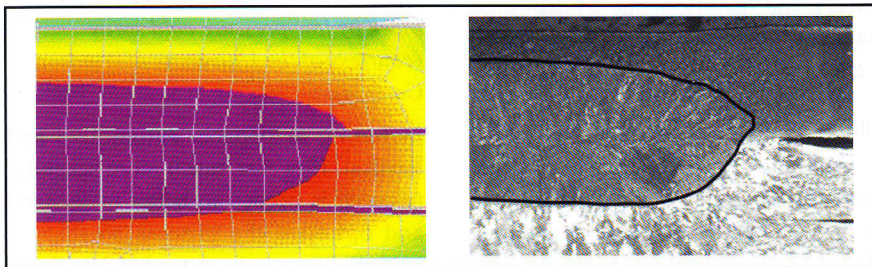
Typical software output with micrograph of actual weld superimposed on the right-hand side for verification purposes. Here we see one sheet of galvanized 1.0-mm USIBOR 1500 high-strength steel being welded to two layers of 0.7-mm mild steel (courtesy of PSA Peugeot Citroën).
